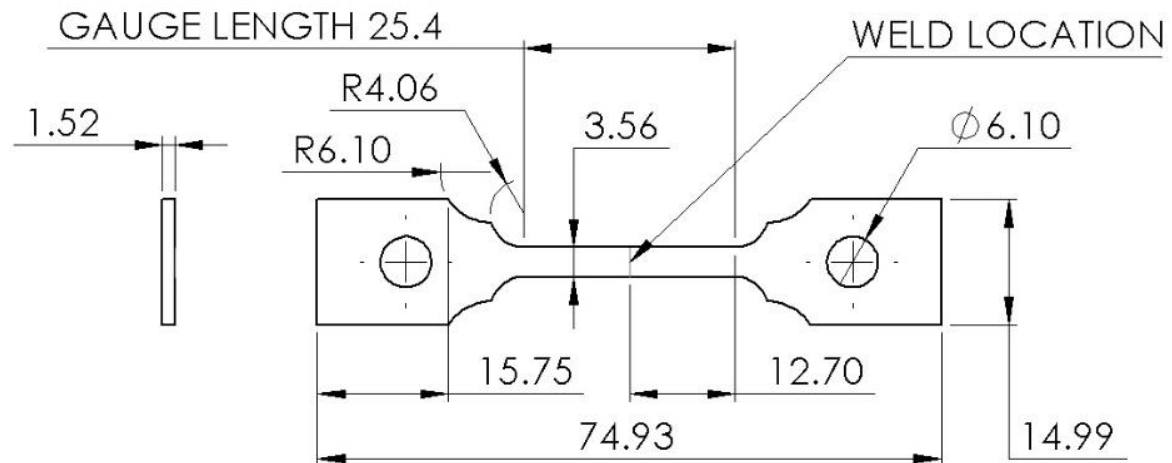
Specimen extraction from the welded samples – dimensions in millimeters.
